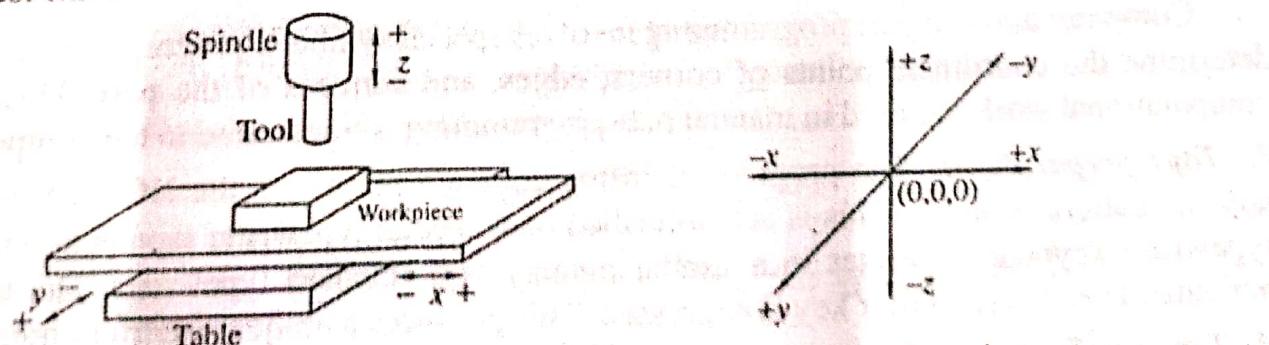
Machining center (vertical milling machine) axis orientation
